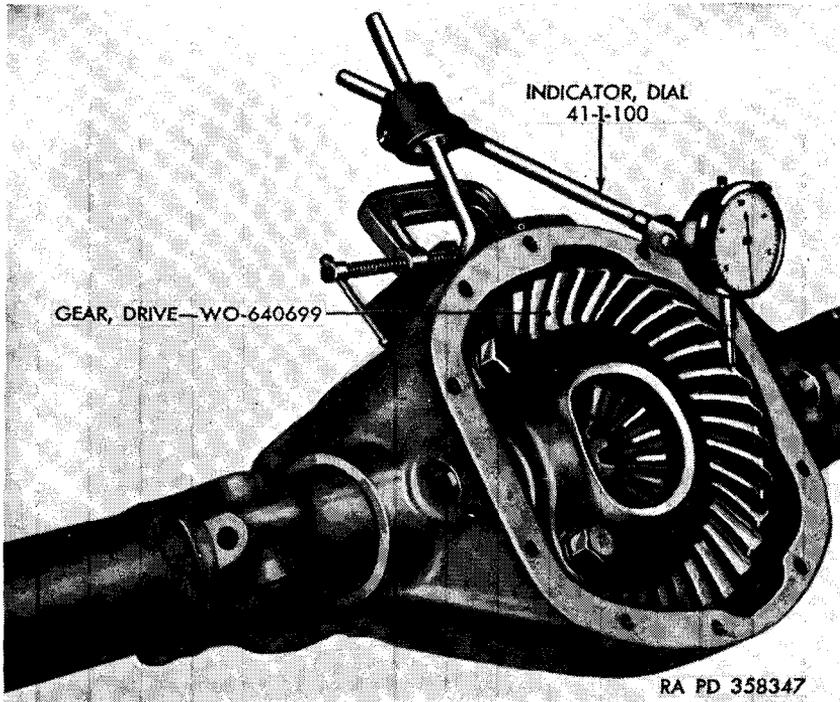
Checking backlash of drive gear with indicator 41-I-100.
